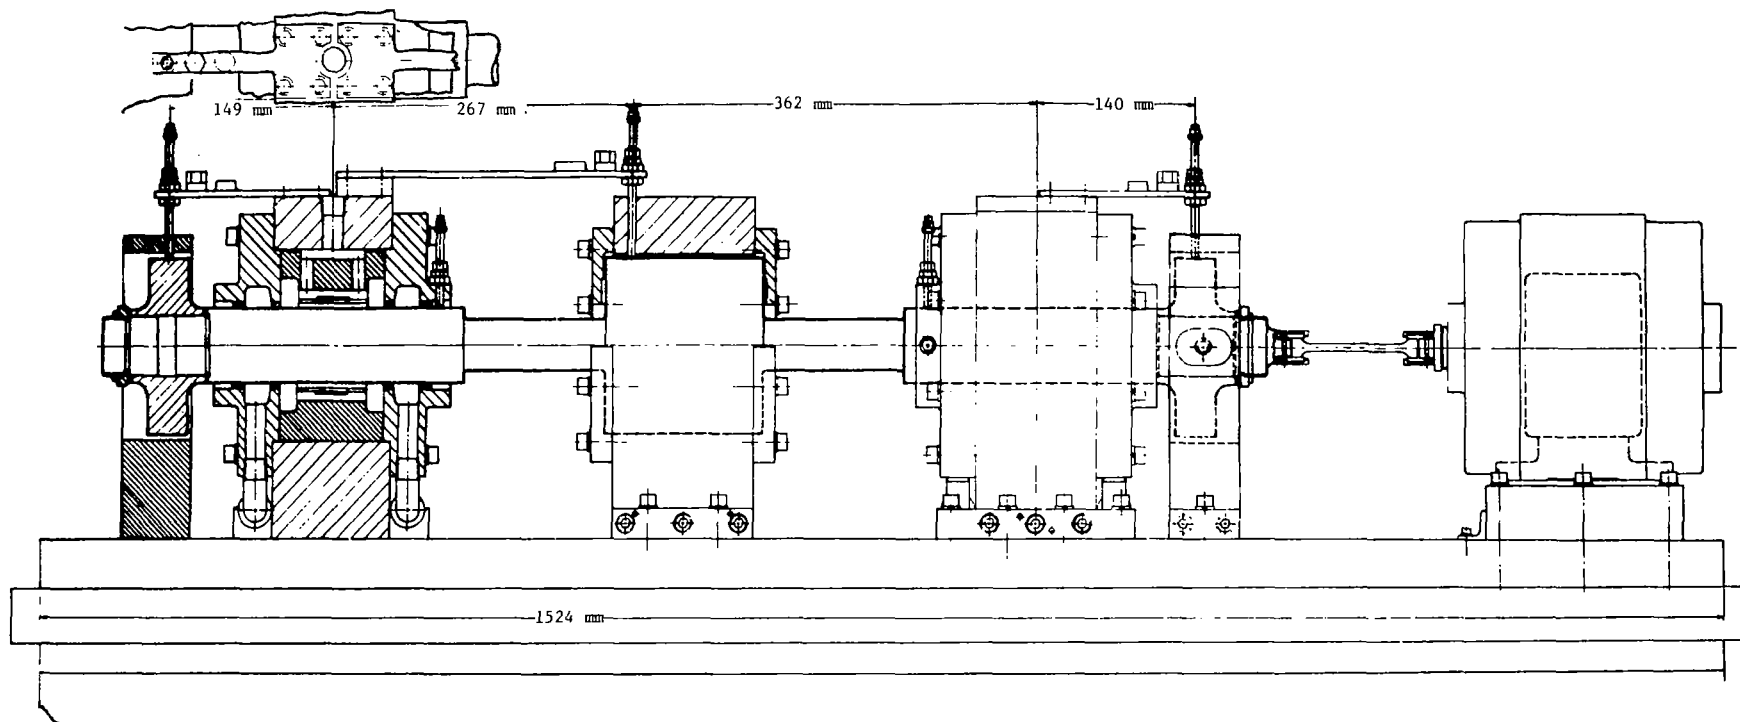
Test Rig with Flat Shaft and Flexibly Mounted Probe Holders
